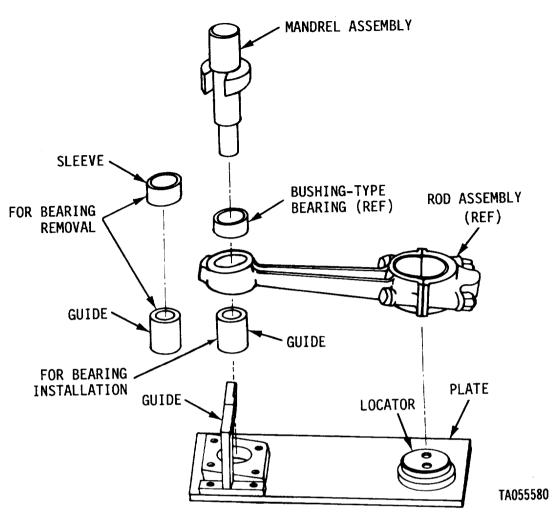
Removing or installing bushing-type beating using improvised tool.
